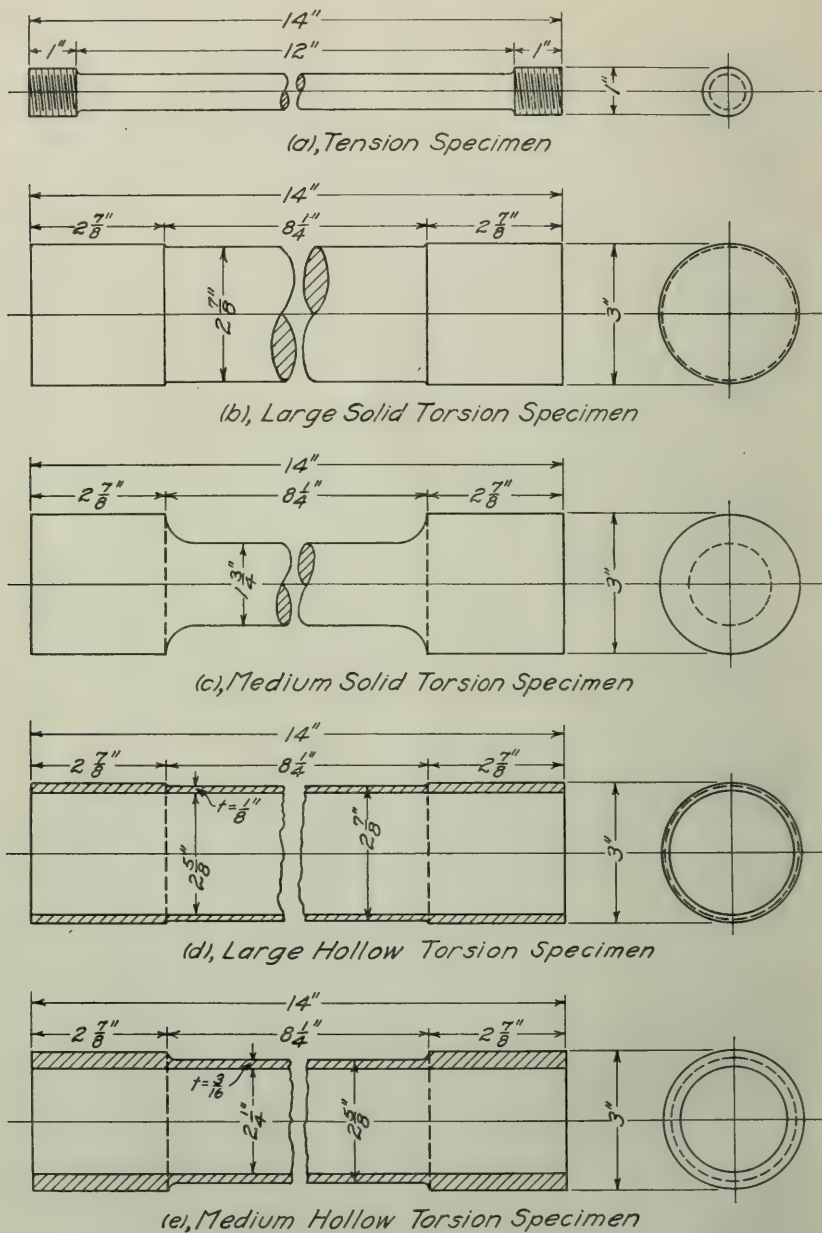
FORM AND DIMENSIONS OF LARGE TEST SPECIMENS
